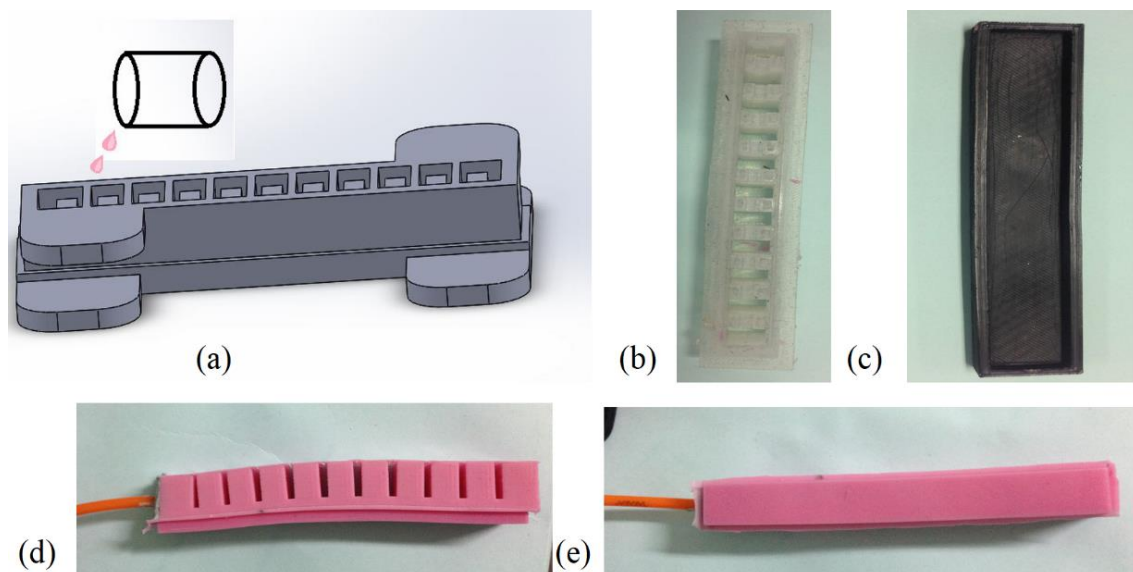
Fabrication process of single actuator: (a) stirred mixture was poured directly into mold and left for curing (b) fabricated air chamber (top layer) after
